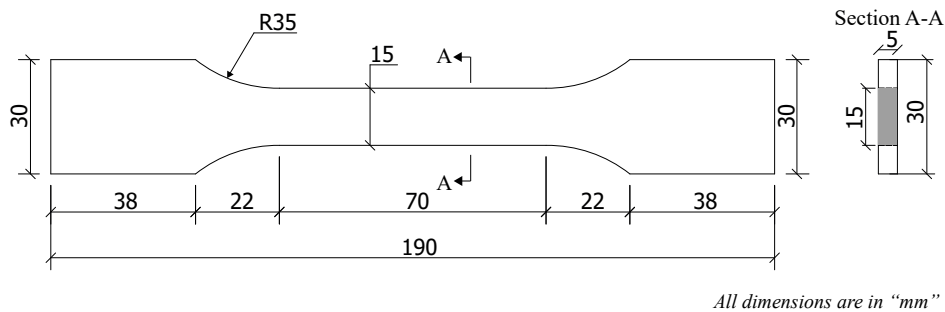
Technical drawing of the rectangular steel coupons / GJSFB test campaign.
